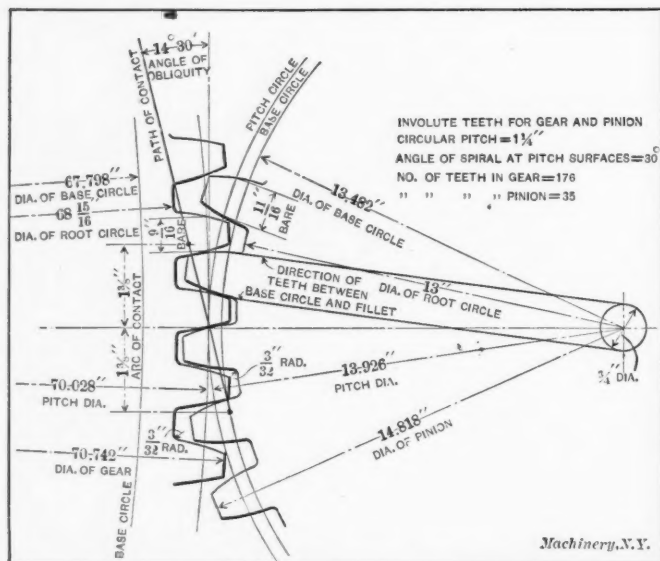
View of Gear Teeth on Plane at Right Angles to their Axes, showing Dimensions for both Gear and Pinion
